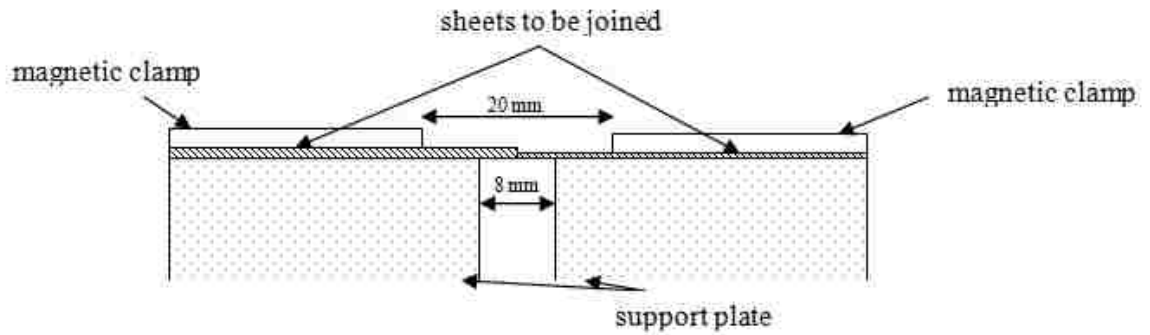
Schematic clamping situation for laser welding experiments.
